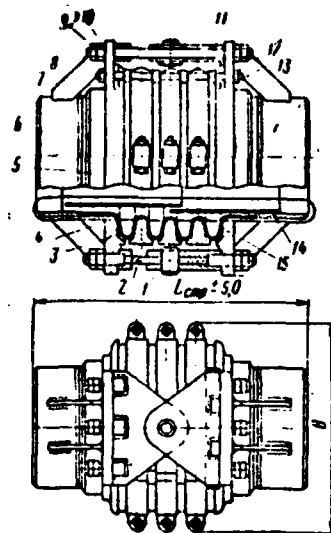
Compensator wavy of the type KVU. 1 - hinge joints; 2 - the collars; 3 - pliable corrugated element/cell; 4 - the carrier rings; 5 - strip rings; 6 - ring branch connections; 7 - stiffening rib; 8 - pin; 9, 10 and 12 - nut; 11 - adapter; 13 - pin; 14 - shell cylindrical; 15 - shell conical.
